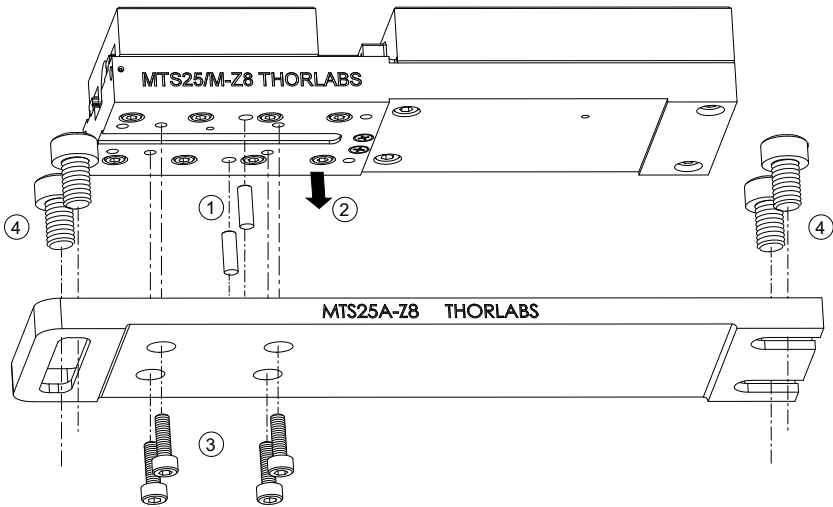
Fitting the MTS25A-Z8 Base Plate
